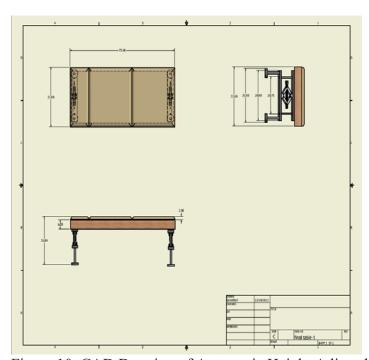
CAD Drawing of Automatic Height Adjustable Massage Table
